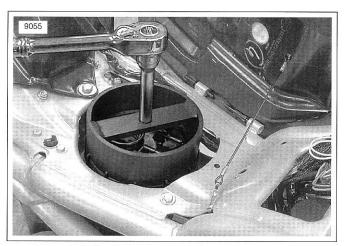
Fuel Cap Remover/Installer (HD-45324)
